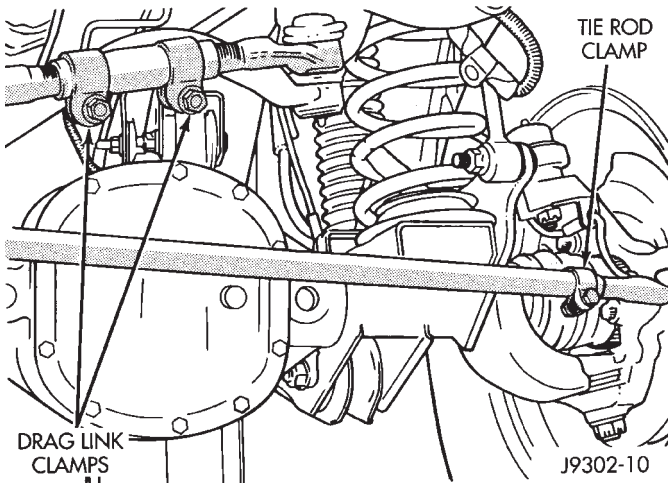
Tie Rod/Drag Link Clamp Bolt
